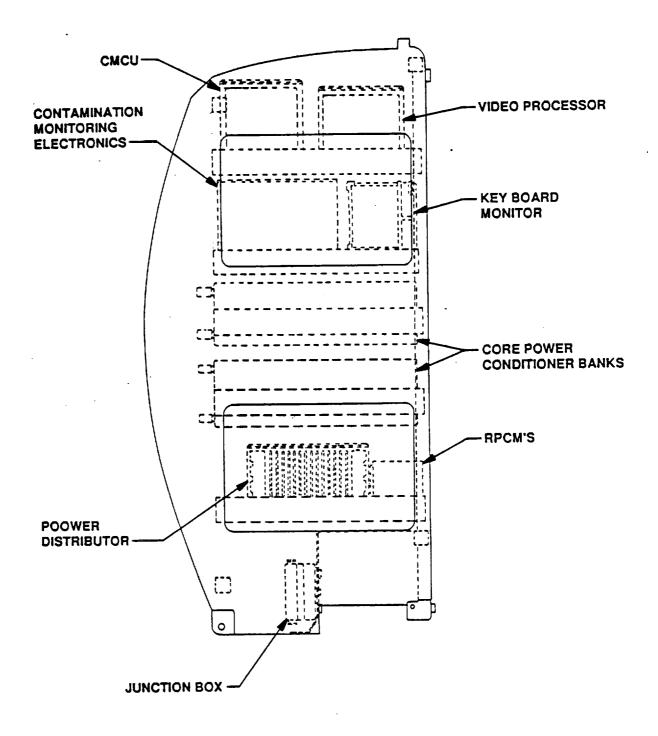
SSFF CORE RACK VIEW B - B (Sheet 2 of 2)
